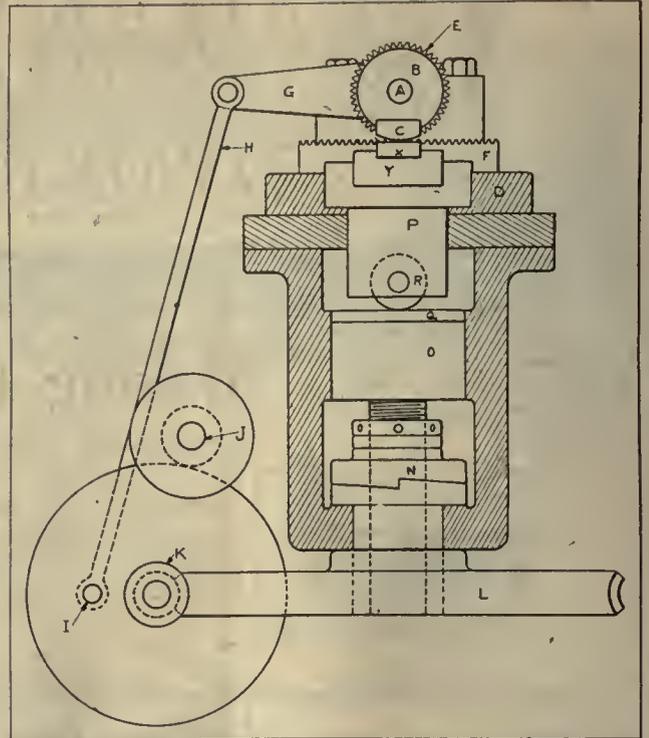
KNEADING MACHINE FOR MAKING TYPE.
